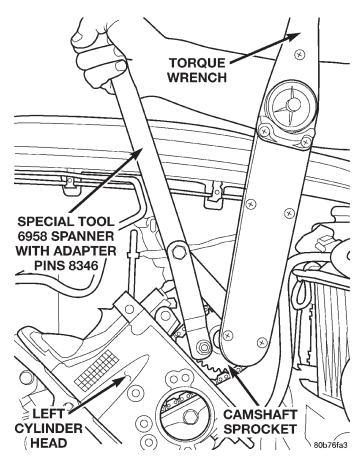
Tightening Left Side Camshaft Sprocket Bolt
